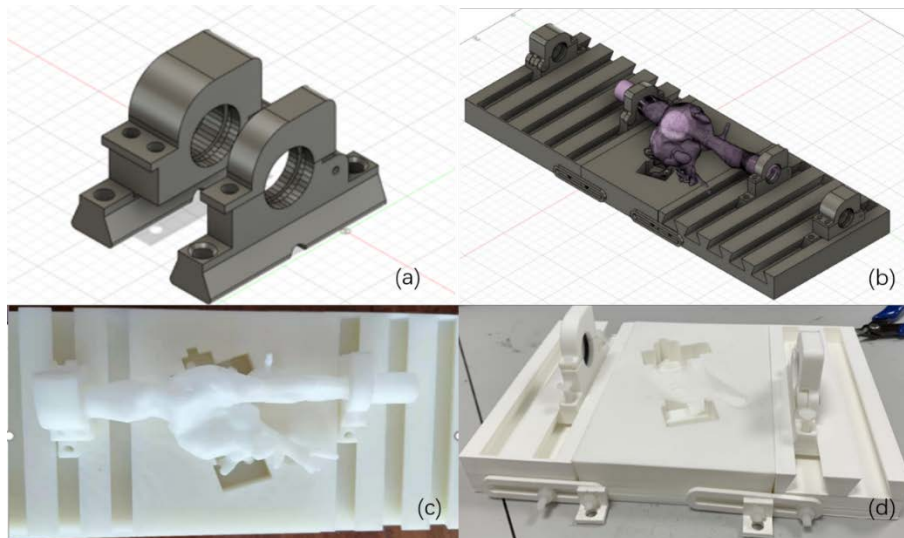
CAD model – atrium mould assembly final version (a & b); (c) 0.5 scale printing results using white resin; (d) full-scale version printing results using PLA
